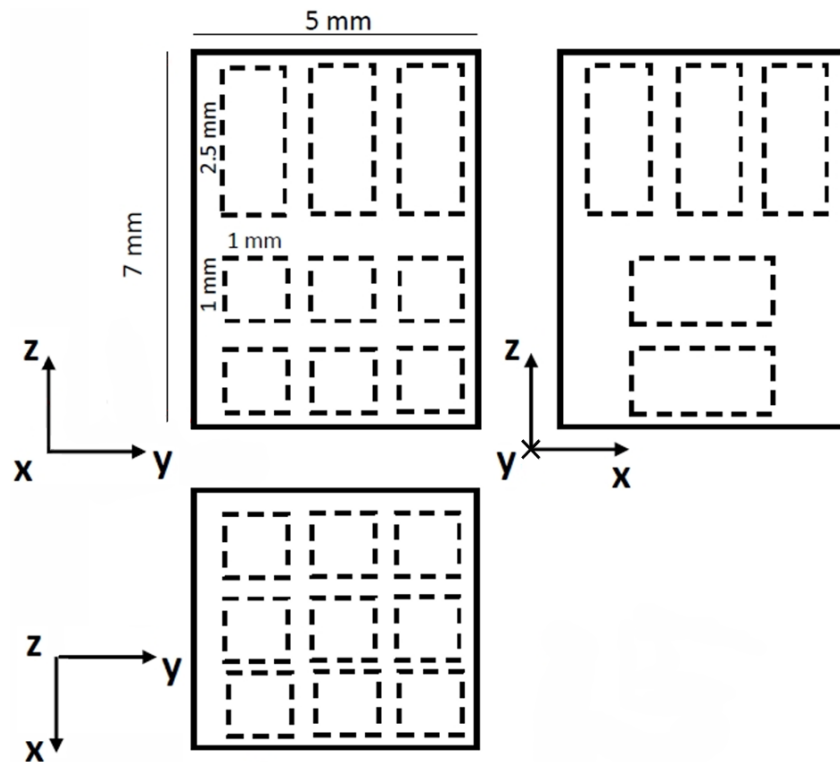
Diagram showing cutting plan for the 15 brick compression specimens
